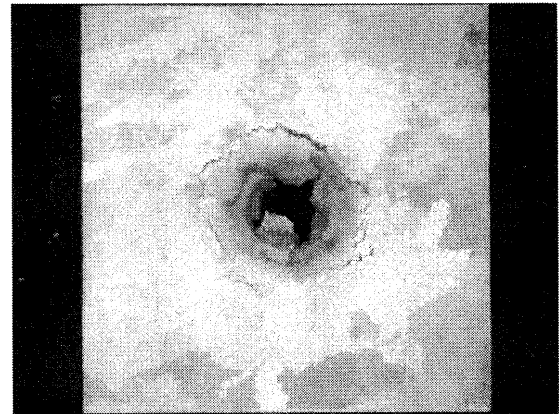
A Typical Fractured Specimen Surface of Disposed 2nd Stage CC Blade Sample Tested at RT (Trailing Edge)
